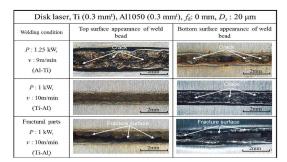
Photographs of top and bottom surface appearances and fractural parts photos of Ti and Al dissimilar welds made with disk laser at different welding conditions.
